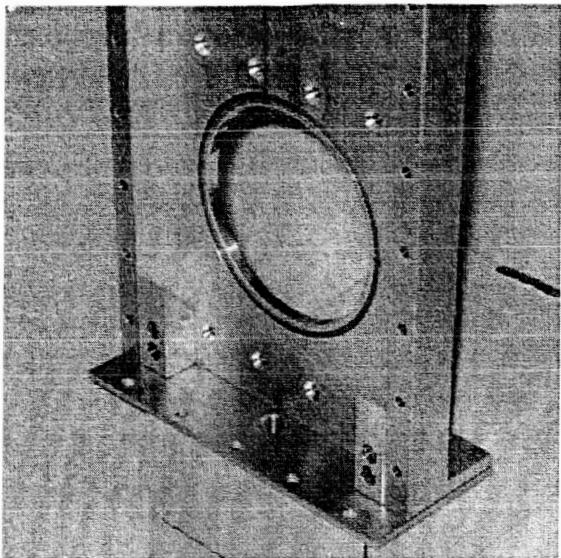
Close-up View of the Evacuation Valve O-ring and Sealing Plate Stops
